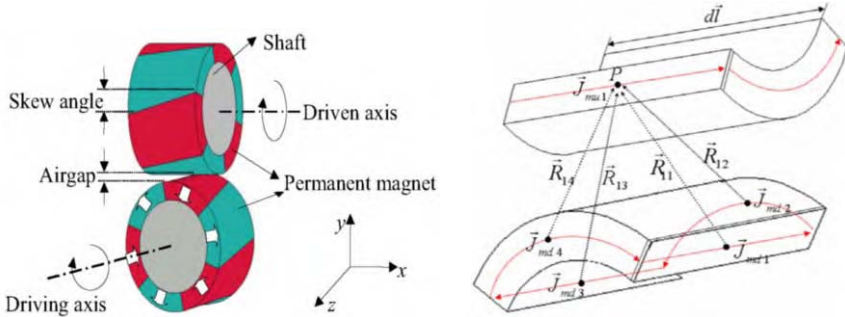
Configuration of magnet gear permanent magnets (upper: running gear; lower: passive gear).
